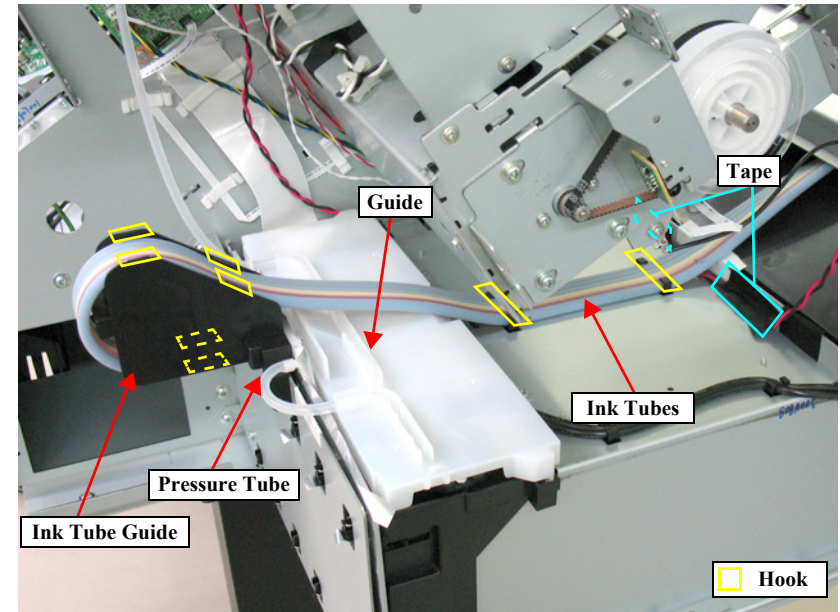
Releasing the Waste Ink Tube and Pressure Tube (before released)
